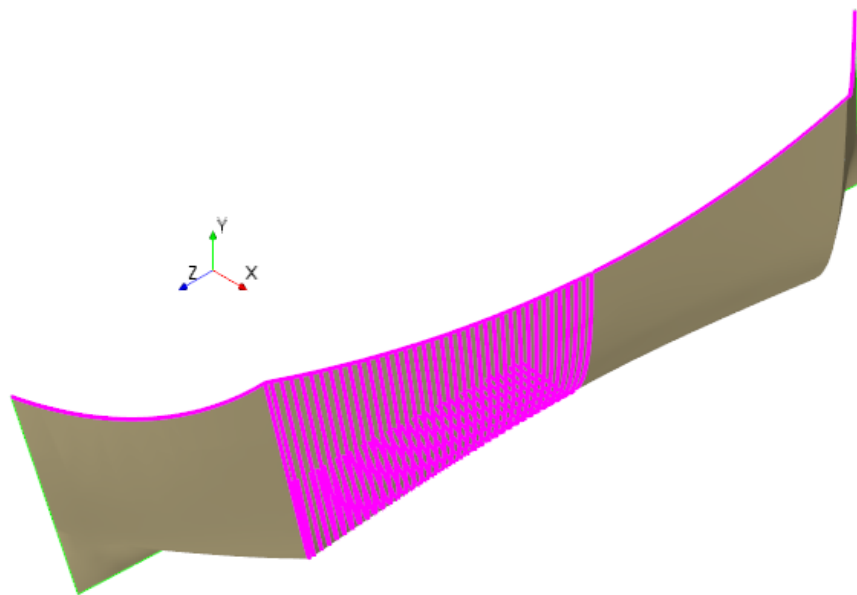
Generation of the membrane shape by fitting surfaces between the guide wires (the stringers and the bottom edge of the membrane) and a series of profile sketches (The bottom edge is not plotted).
